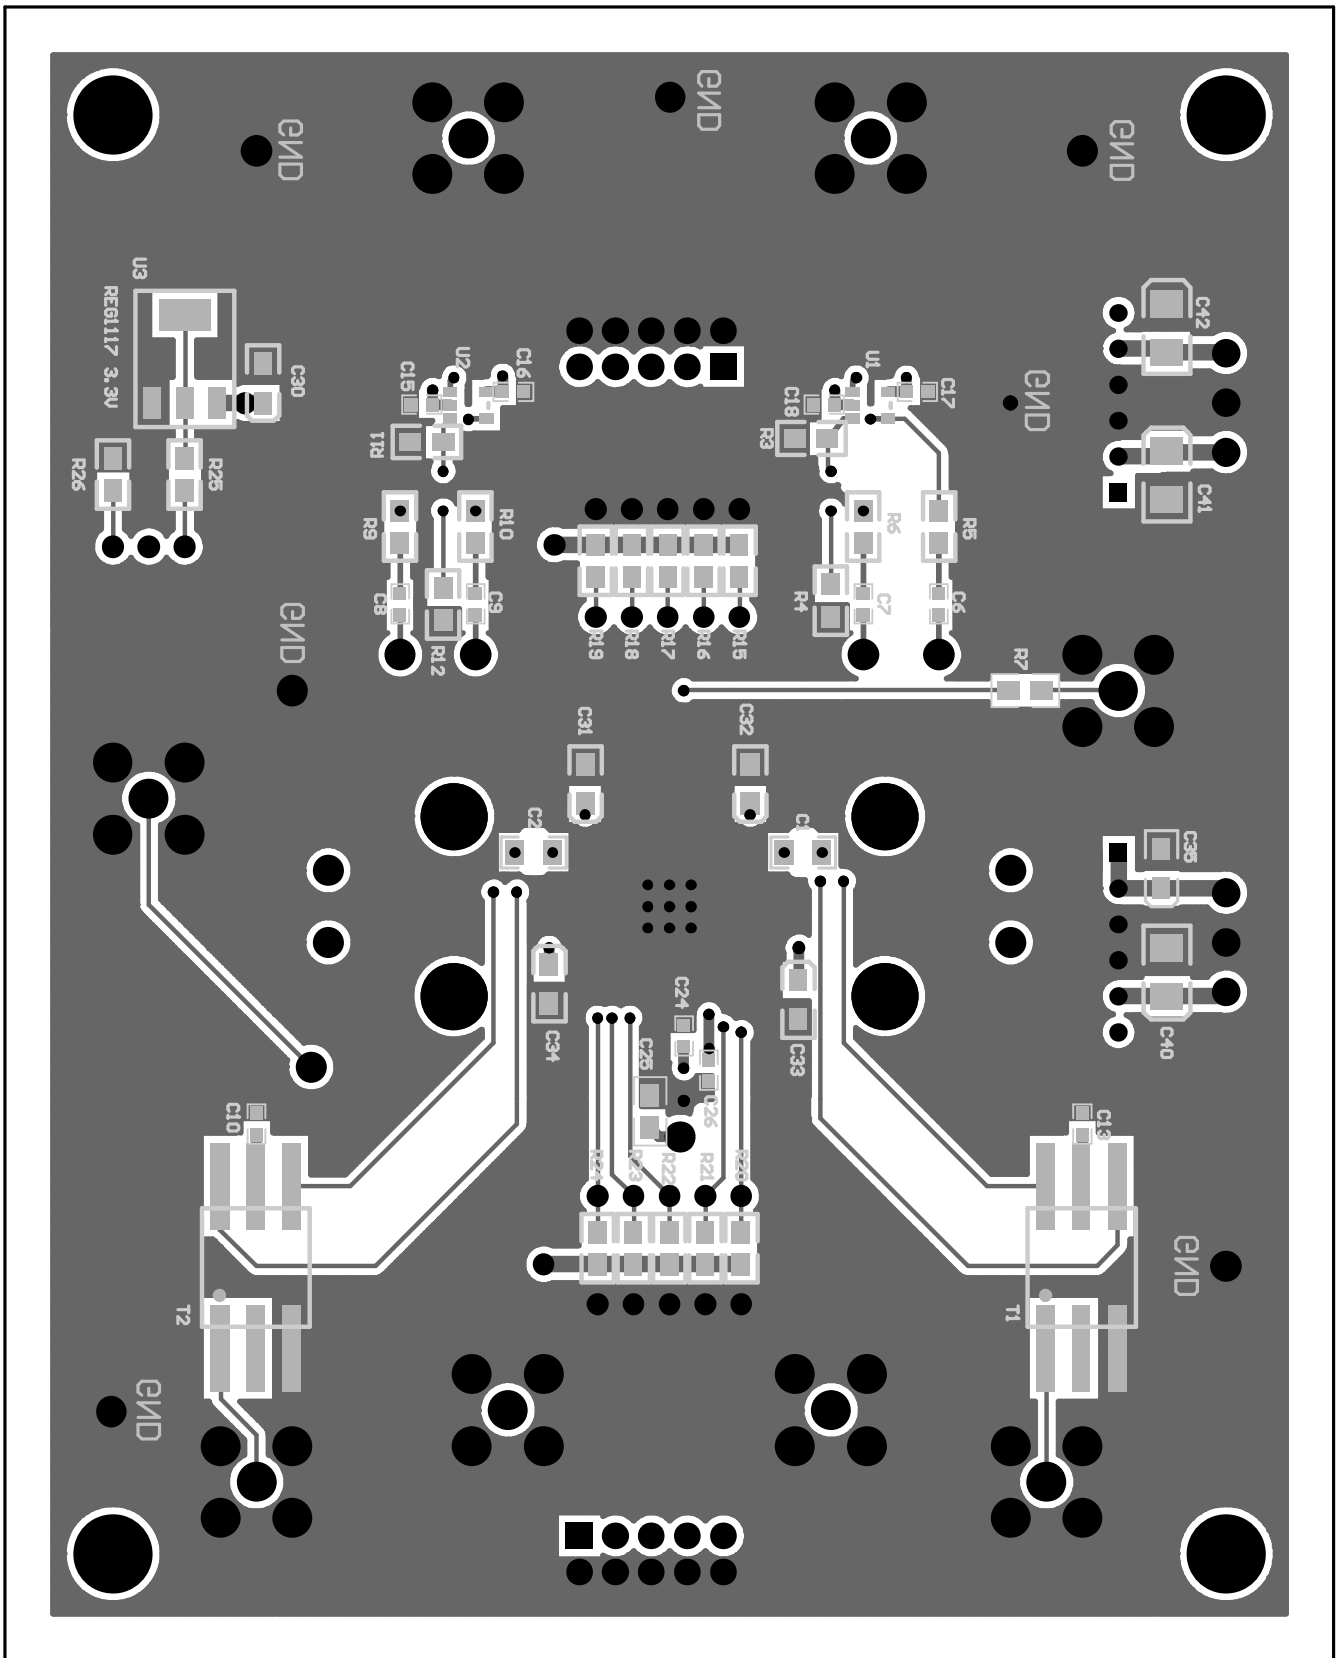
VCA2615EVM PCB Bottom Layer (Bottom View)
